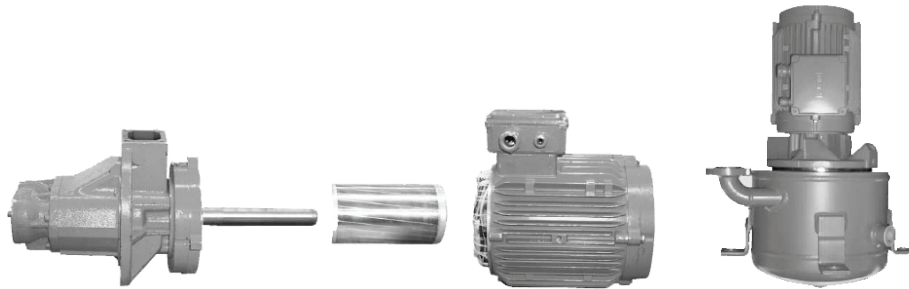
Variable-speed rotary screw air compressor. The compressor shaft and the rotor of the motor form one piece, and thus, no coupling elements are needed. Additionally, there is no need for motor bearings, which increases the operating safety. Generally, loss-free power transmission can be expected with this construction.
